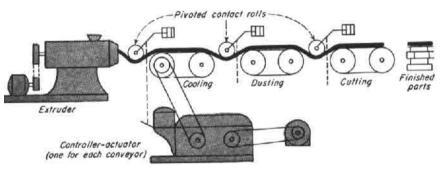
Dimension control of extruded materials calls for primary indicators like the contact rolls shown. Their movements actuate conveyor control mechanisms.
